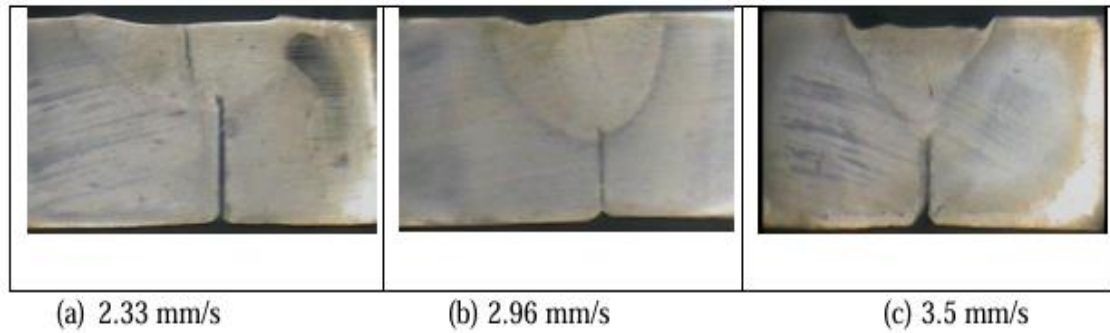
Optical microscopic Image at weld zone of TIG welded specimen with use of TiO₂ flux.
